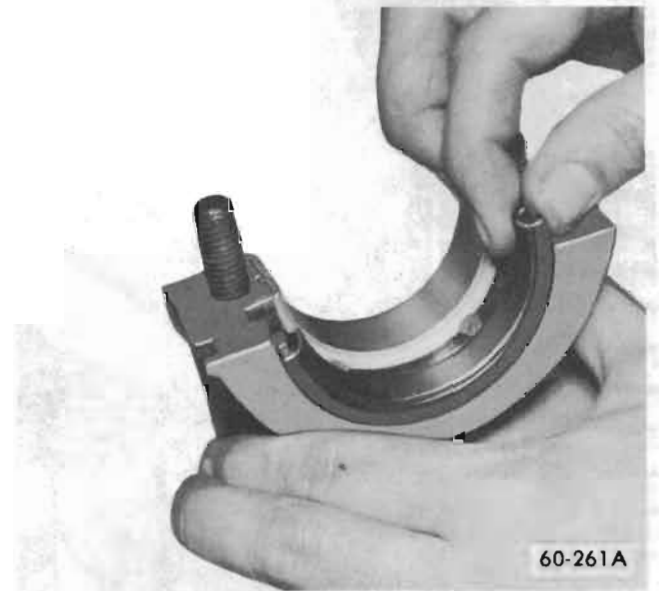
Removing Rear Main Oil Seal (Lower)
